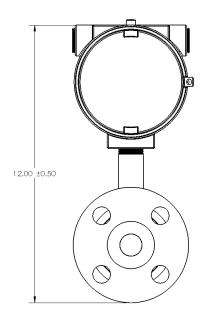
DENSITRAK SVT - FRONT VIEW - DIMENSIONS
